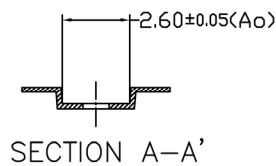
SKY16602-632LF Tape and Reel Dimensions
